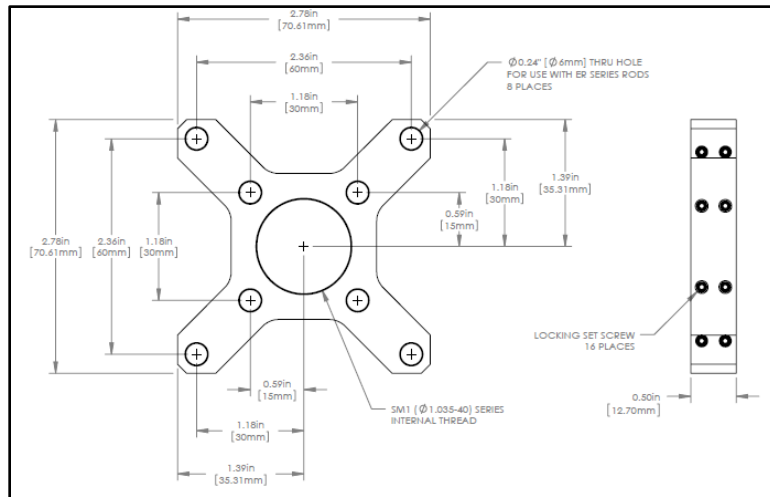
Thor Labs LCP02 - 60mm Cage Plate Adapter Drawing A [53]
